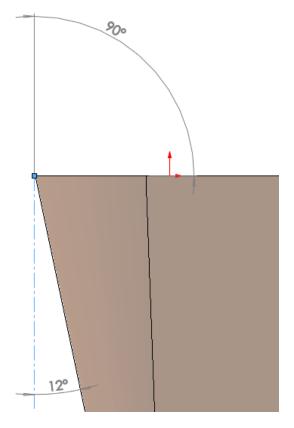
Example tool shown perpendicular to the rake face and parallel to the cutting direction for standard cutting with no skew.
